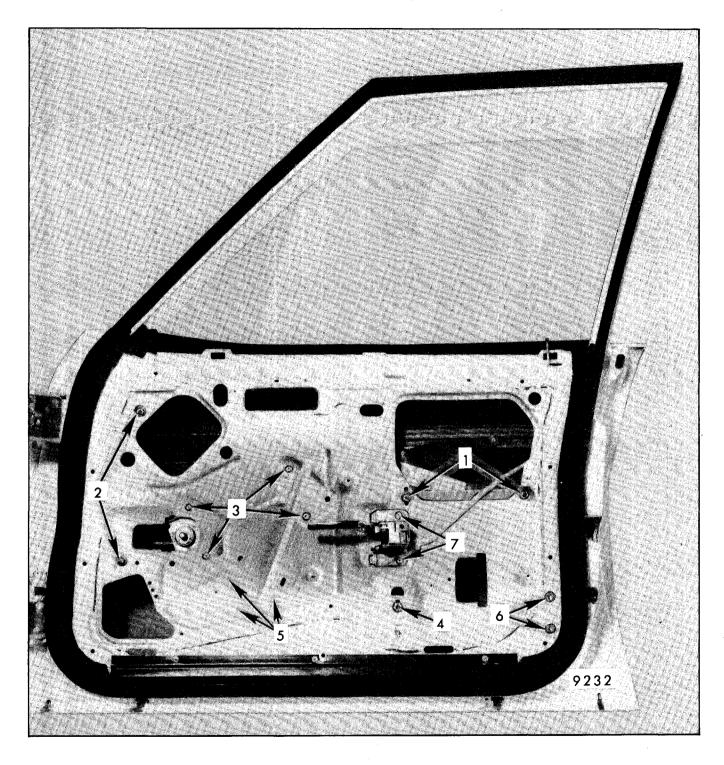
Front Door Hardware Attachments - B, C Styles (Sedan Door Shown, Coupe Door Similar)
